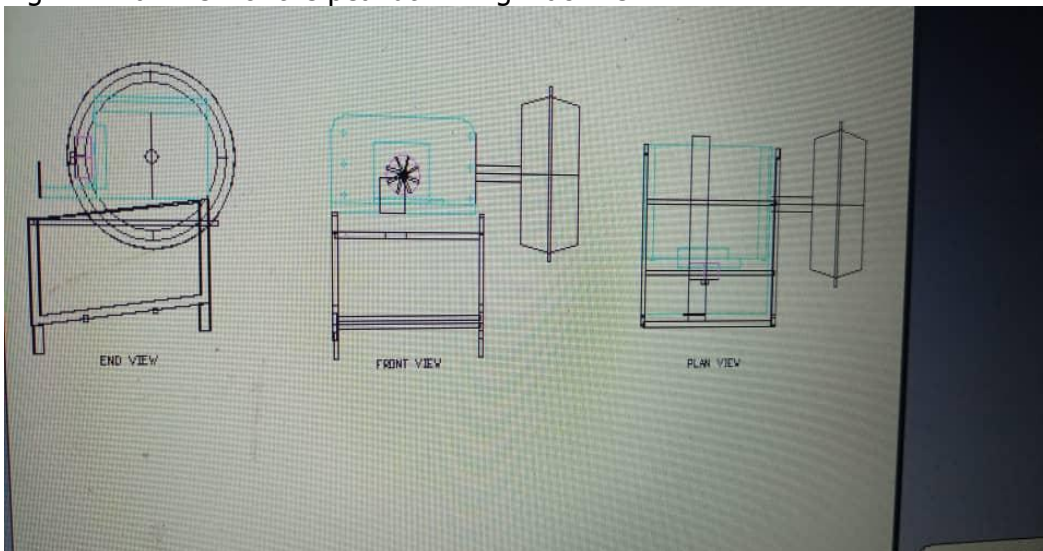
Plan view, rear view and front view of the peanut mixing machine
